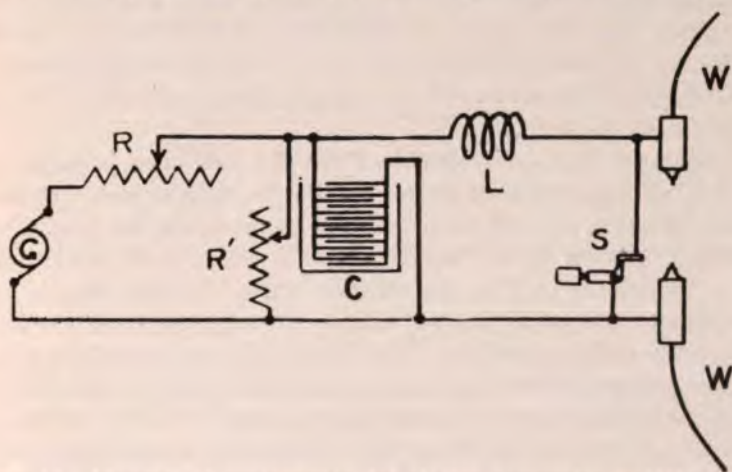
Diagram of construction for electro percussive welding. G—Generator; R, R'—Resistors; C—Condenser; L—Inductance; S—Short circuiting switch; W, W—Jaws holding wires to be welded.
